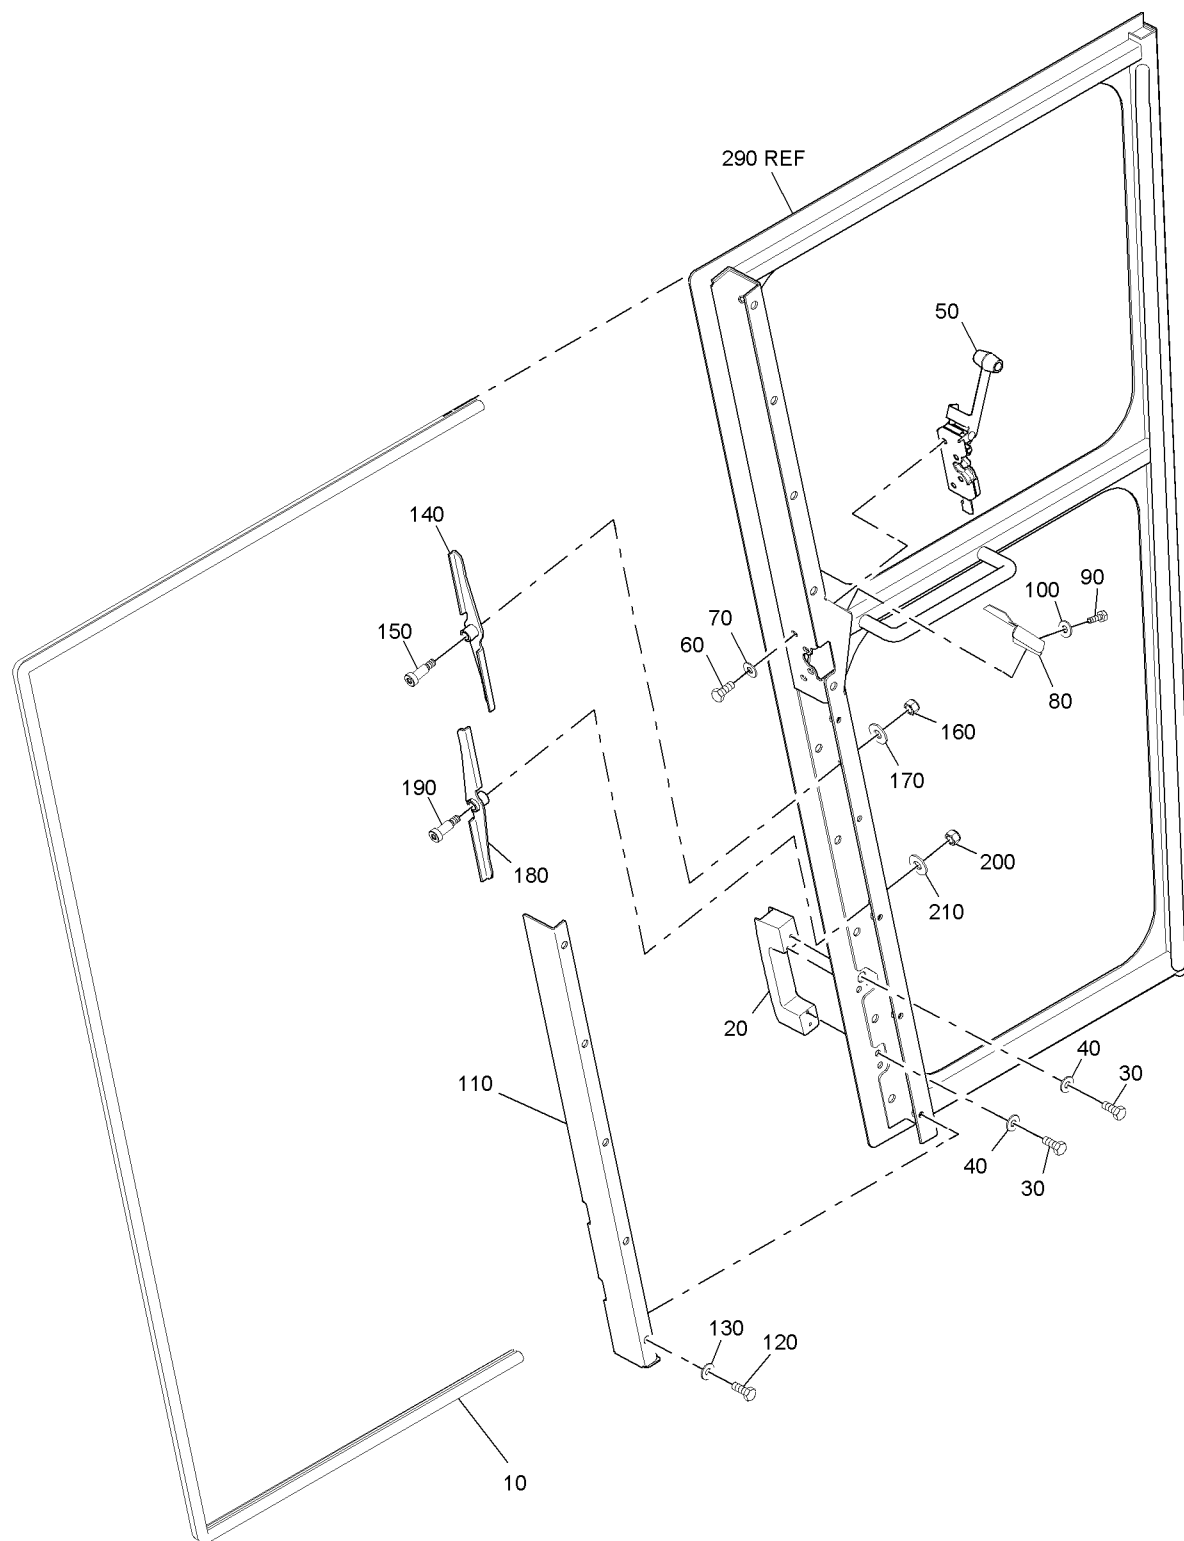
RIGHT-HAND DOOR ASSEMBLY (SHEET 1 OF 2)
